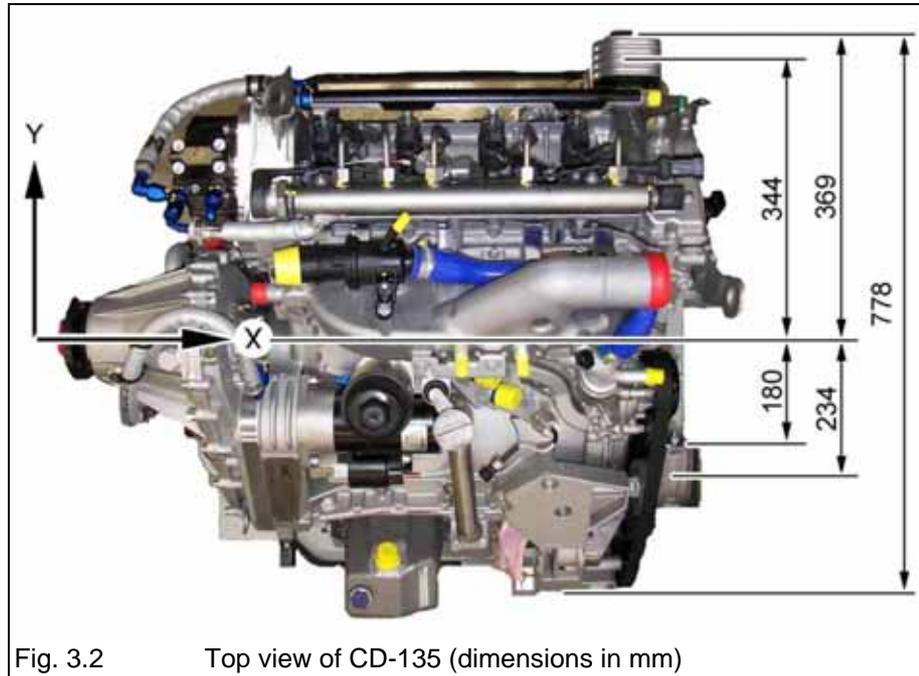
Top view of CD-135 (dimensions in mm)
